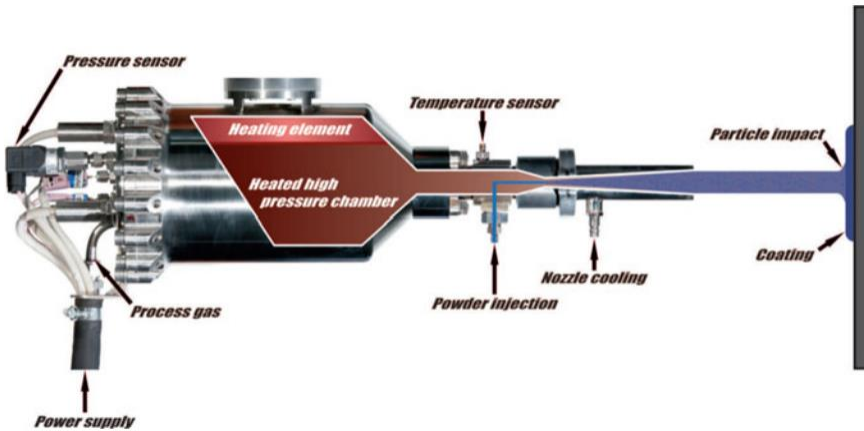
A schematic of a complete CSAM spray gun showing the various inlets, hoses, wiring, pressure chambers and nozzle section and how it is typically laid out [17].
